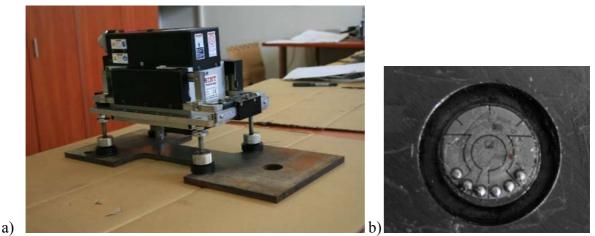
a) MTS3000- Ring-Core; b) K-RY51-5/350 after milling
